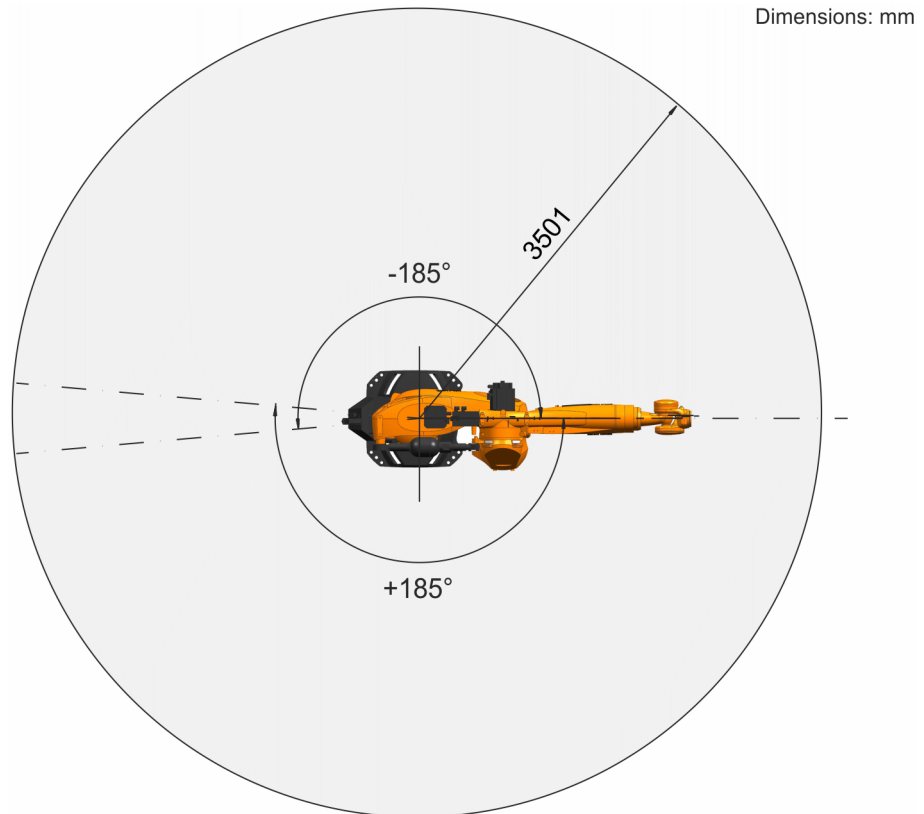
KR 120 R3500 prime K, working envelope, top view
